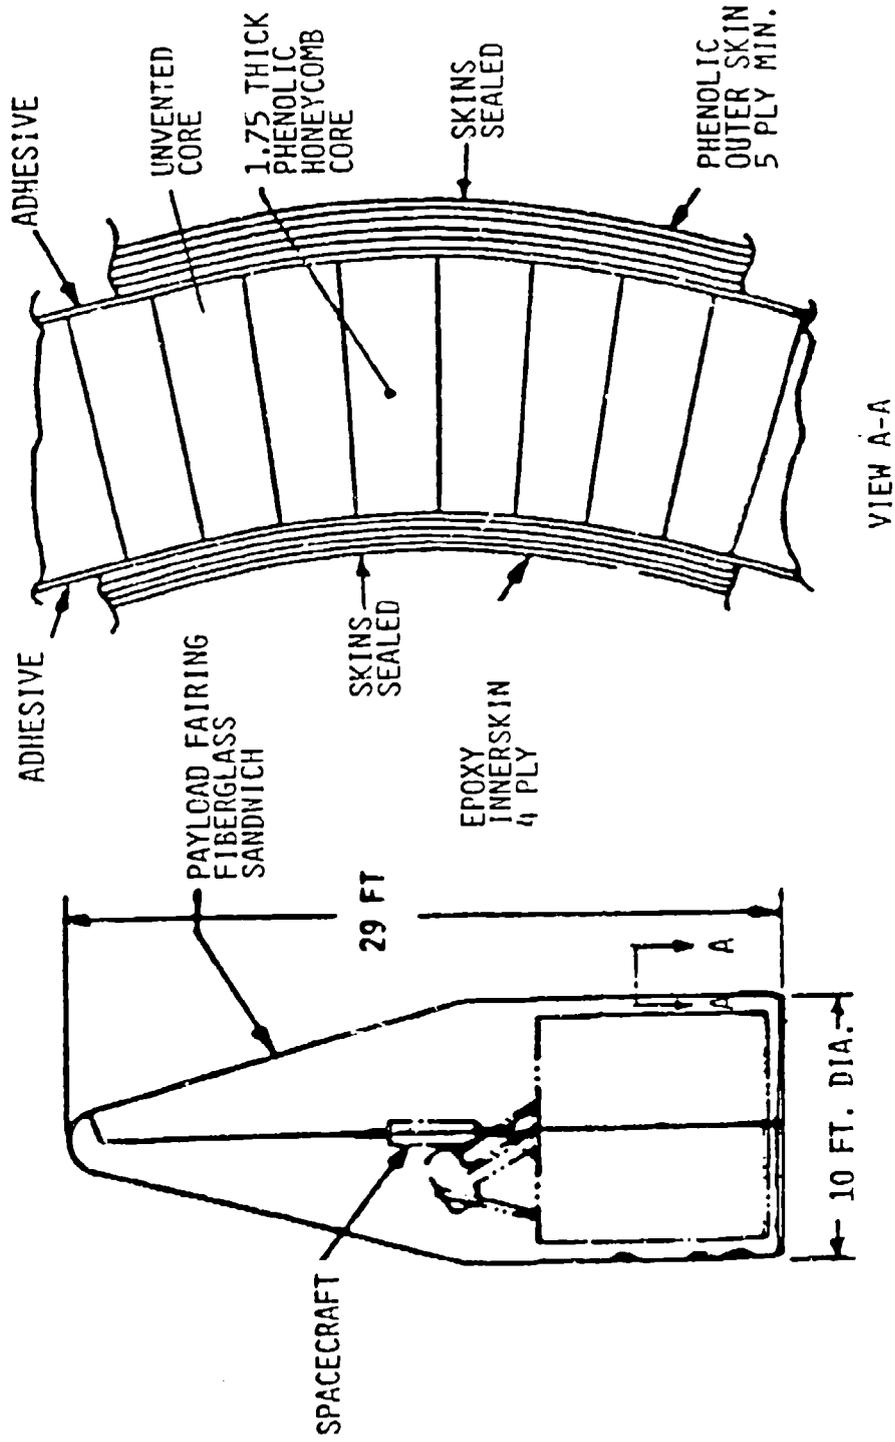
(from Ref. 2) shows the construction, consisting of a four-ply glass/epoxy inner skin and a five-ply glass/phenolic outer skin, bonded with HT-424 film (tape) adhesive to 1.75-in. thick HRP (glass/phenolic) honeycomb core of 3/8 in. cell size.
